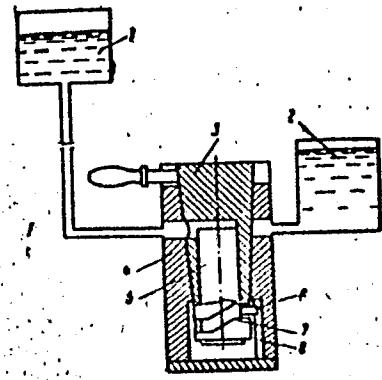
1--airtight vessel; 2--airtight delivery vessel; 3--plug; 4--valve housing; 5--piston; 6--pin; 7--guide slot on the plug stem; 8--vertical slot in the valve housing
